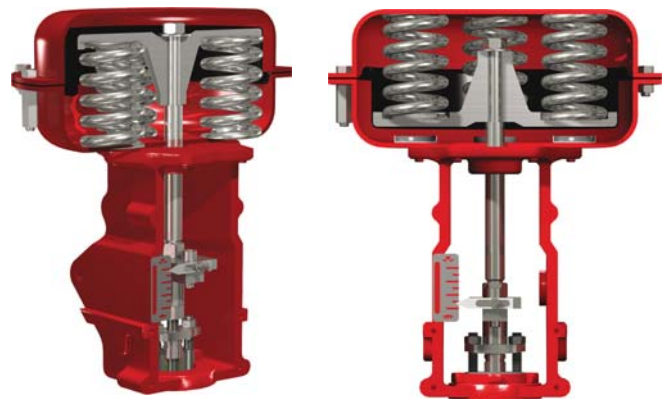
Pneumatic Diaphragm Actuators, Air Fail Open to LH side, Air Fail Closed to RH side (Dresser)
